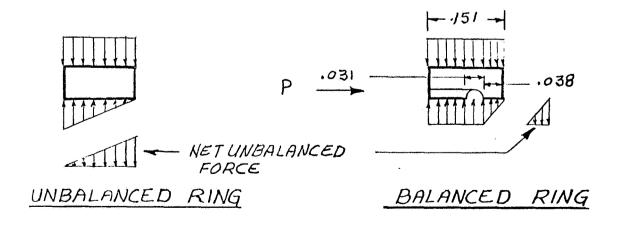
Seal Leakage Test - Contracting Sealing Rings
